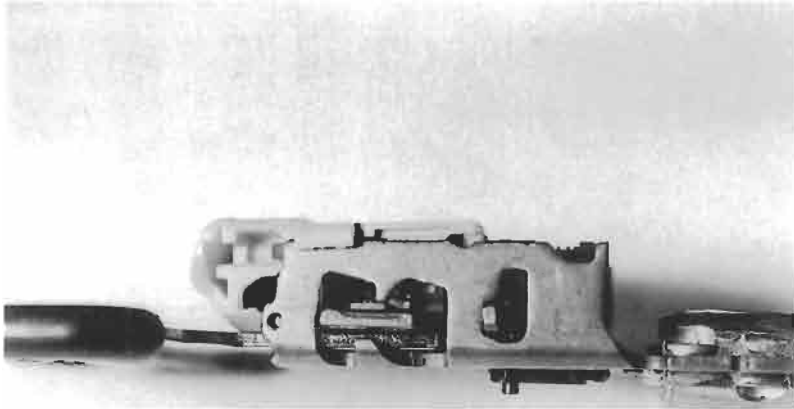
Seat belt receptacle, with housing removed to show mechanism components. The clasp, at left, is latched in place.
